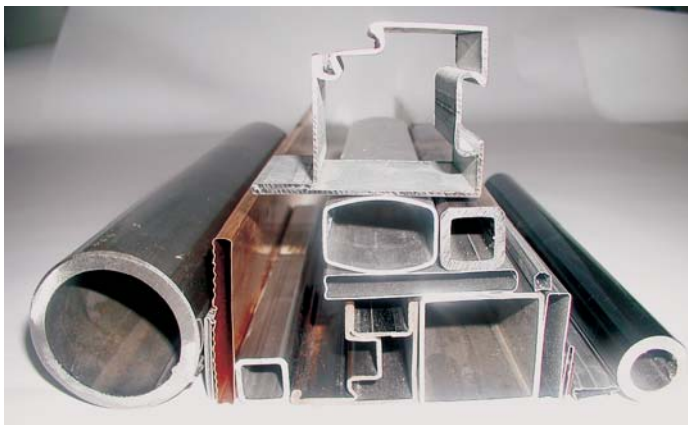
Different forms of longitudinal-seam welded profiles
